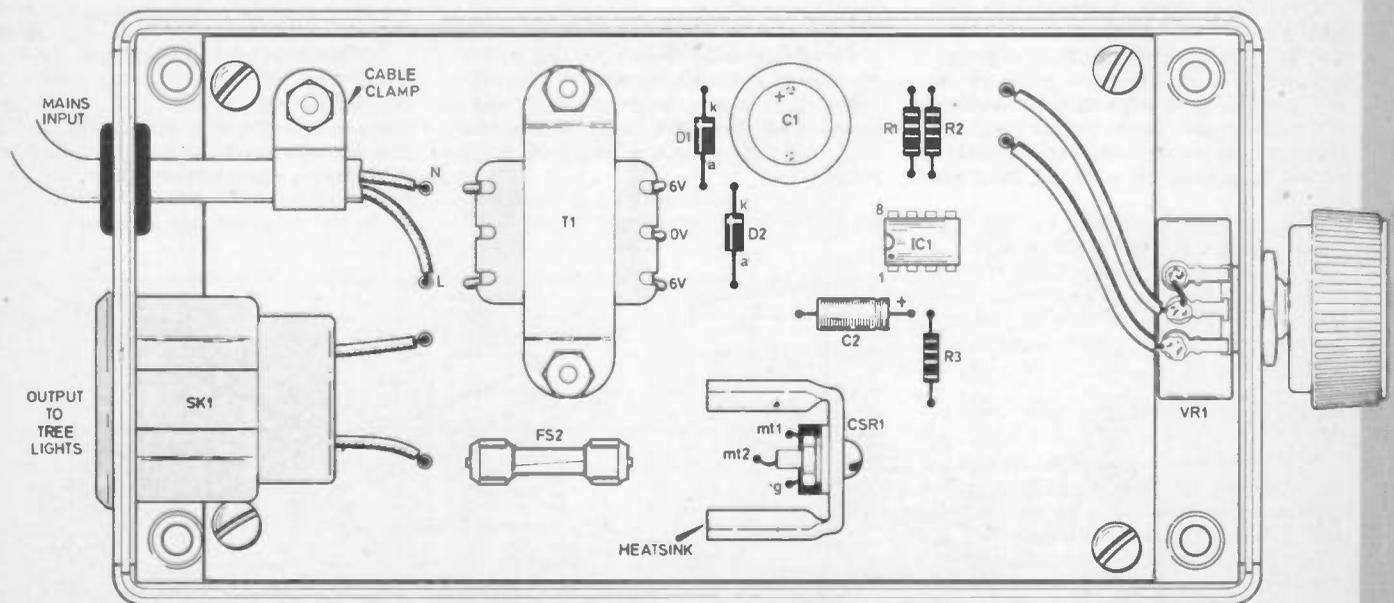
Component layout of the p.c.b. shown mounted in the case with all interwiring shown.
